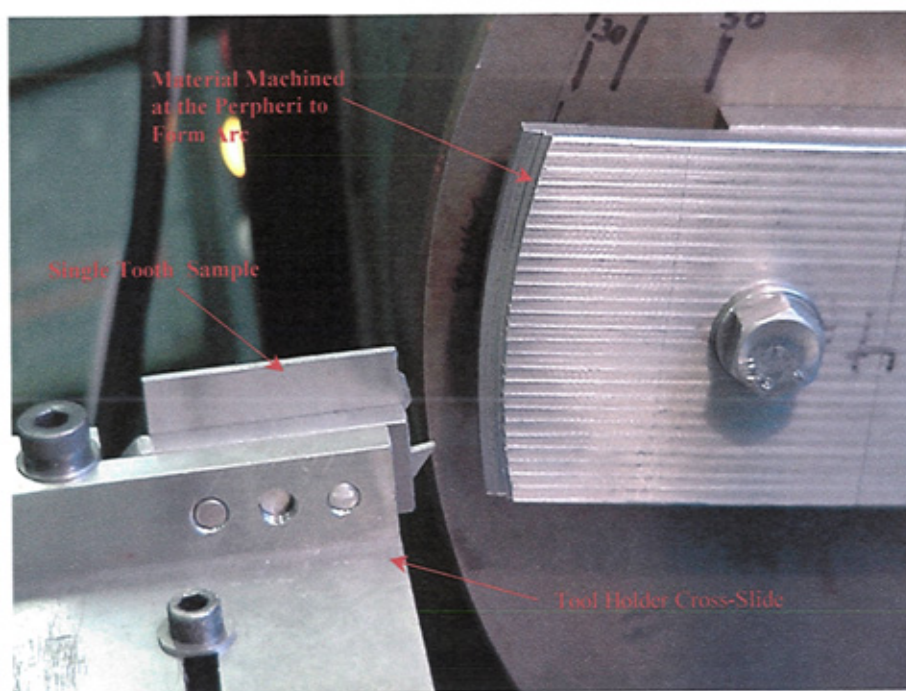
Workpiece material pre-machined on the periphery using a single tooth sample
